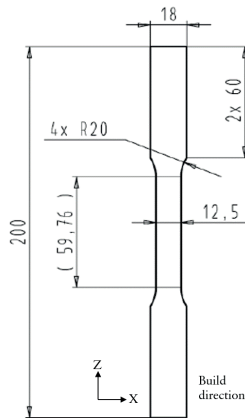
CAD design and dimensions (in mm) of the specimens used in Paper V.
